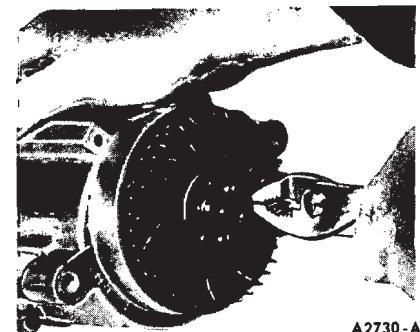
Removing Thermactor Air Pump Centrifugal Filter Fan
